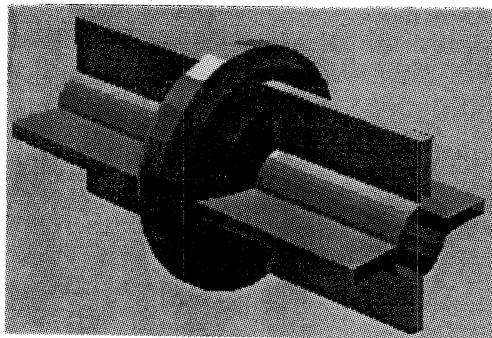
A three dimensional view of an RF cavity loaded with grooved beam pipes at both ends.
